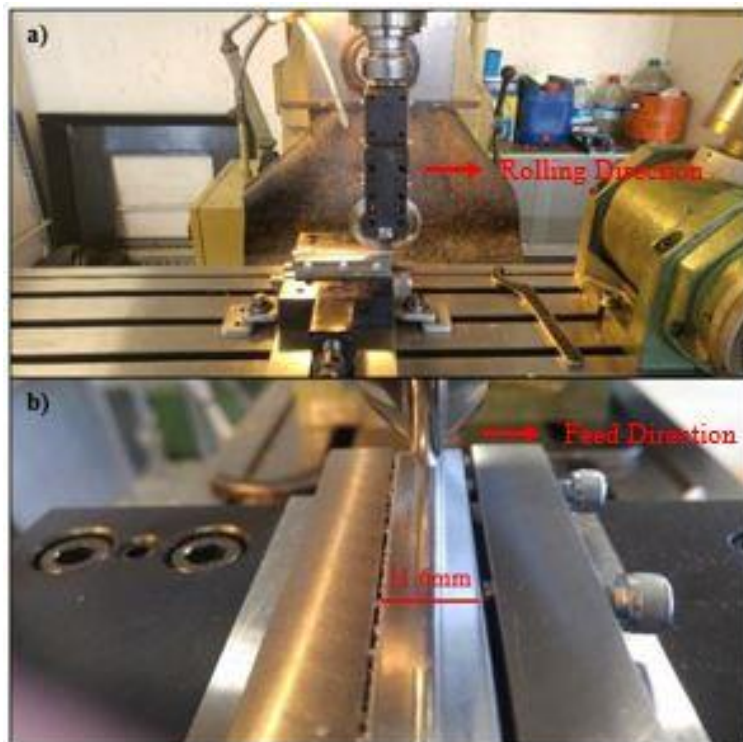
Deep Rolling of Flat Specimen (a) Side-view (b) Front-view
